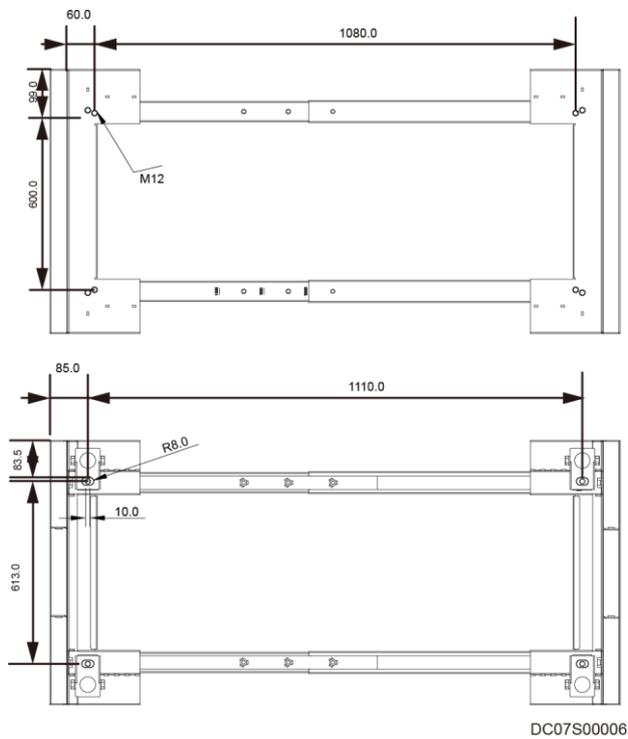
800 mm wide base hole dimensions (Unit: mm)
